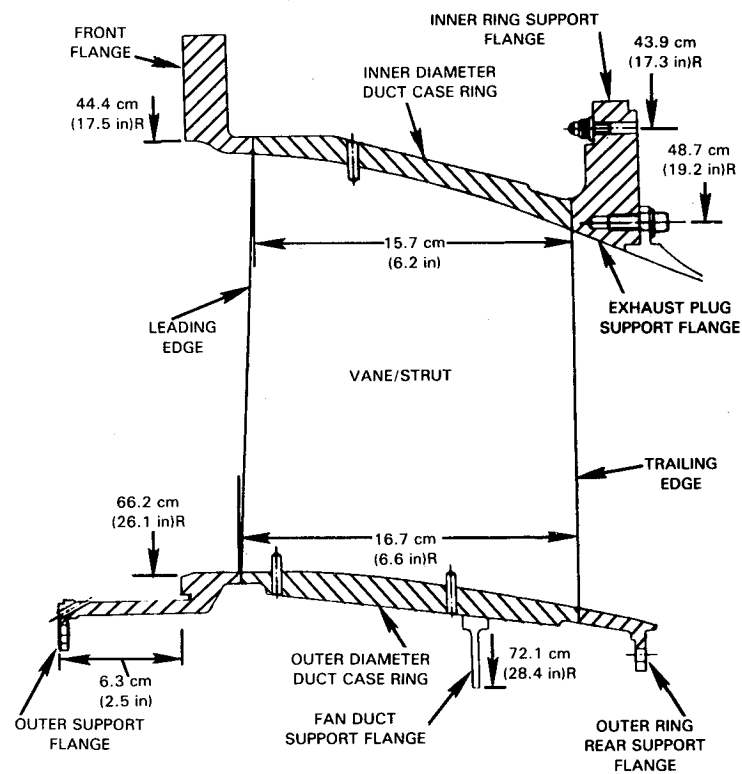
Mechanical Definition of the Exit Guide Vane
